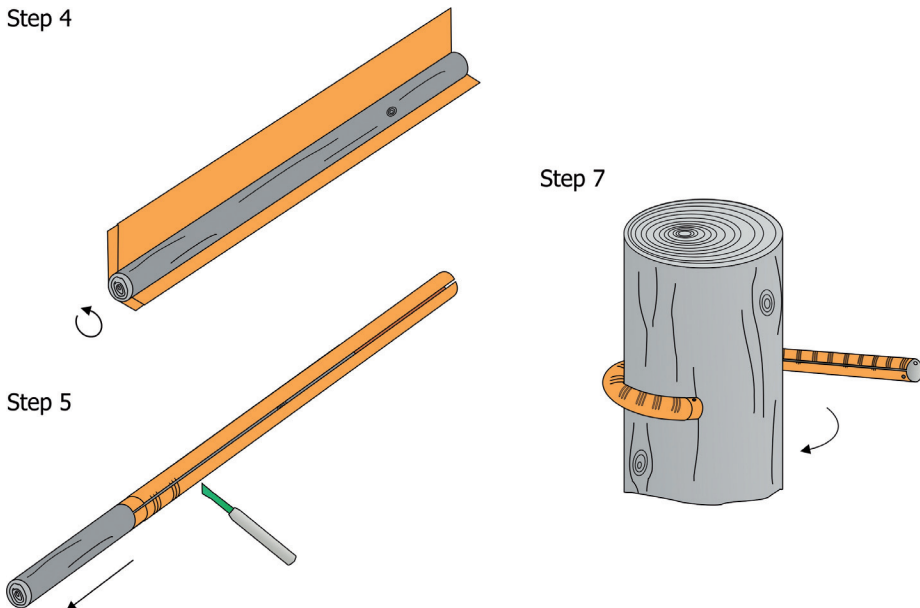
Selected steps in manufacturing hollow necklaces from forged sheet metal. Drawing by K. Dziegielewski
